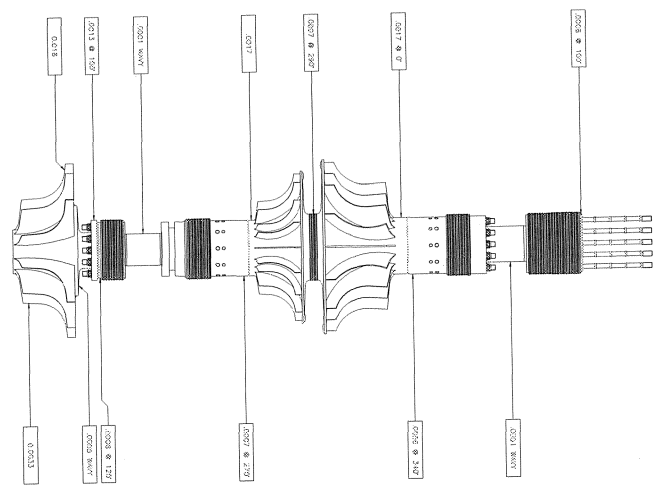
Progressive Balance Runouts Number 2. Expander Wheel Assembled.
